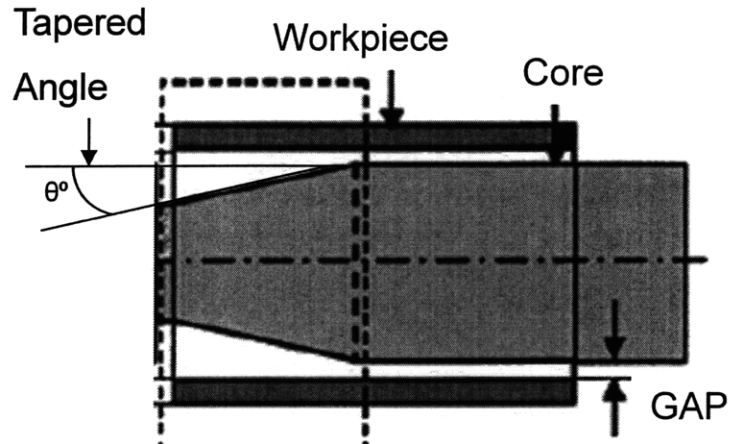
Design of an EMW workpiece and core setup depicting the important design parameters [9].
